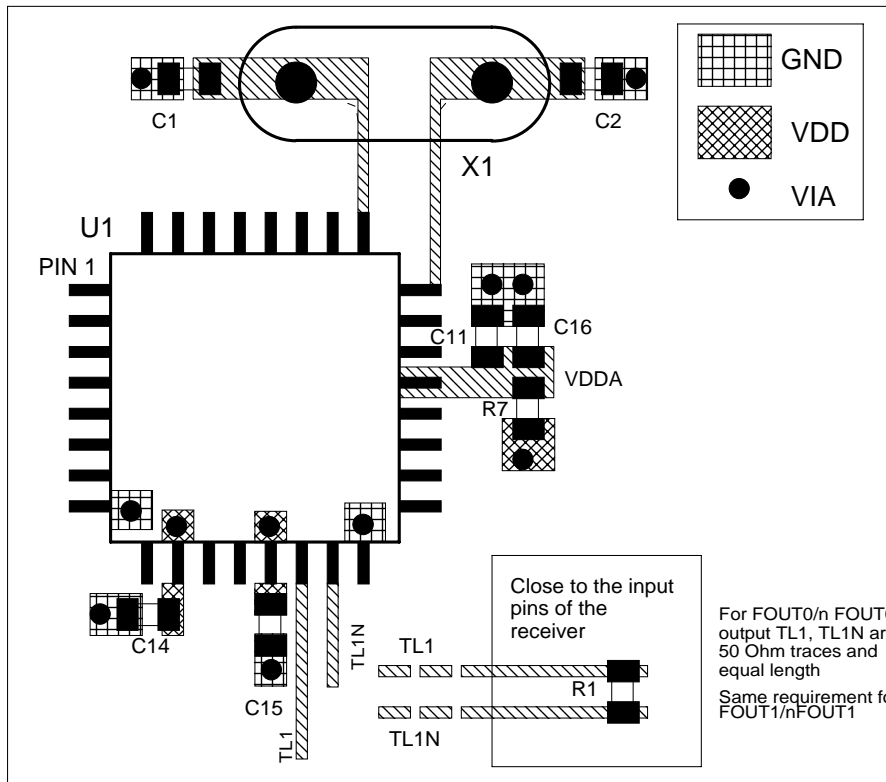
B. PCB BOARD LAYOUT FOR ICS8442
